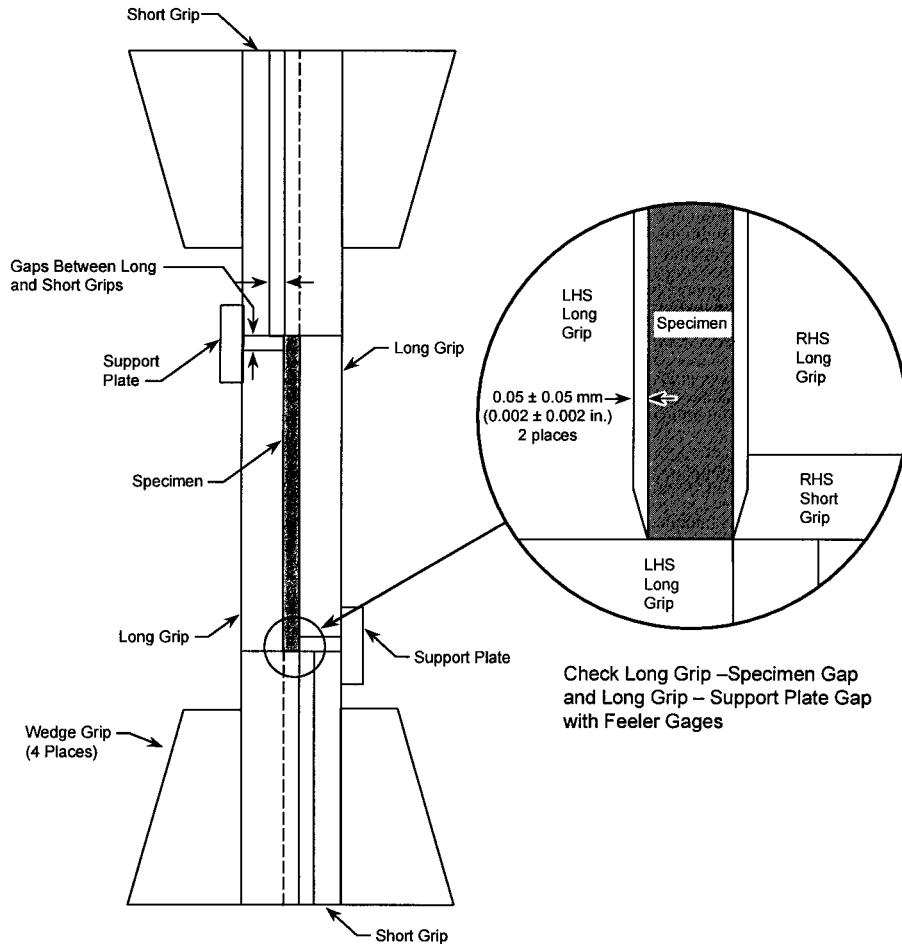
Specimen/Fixture/Grip Assembly, Procedure A (Hydraulic Grip Loading)
